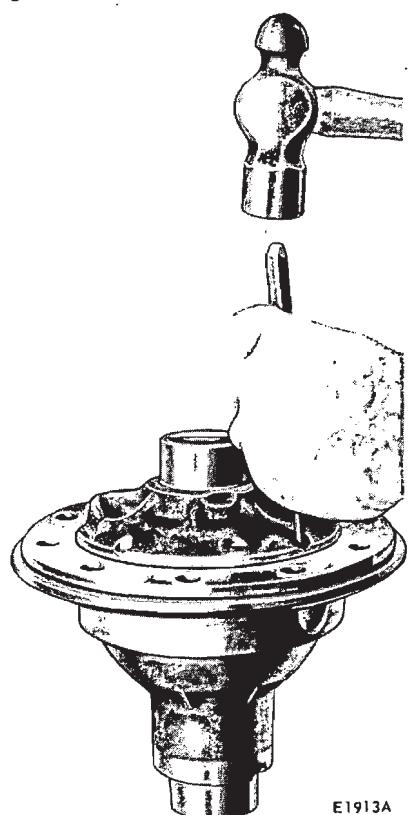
Differential Pinion Shaft Lock Pin Removal
